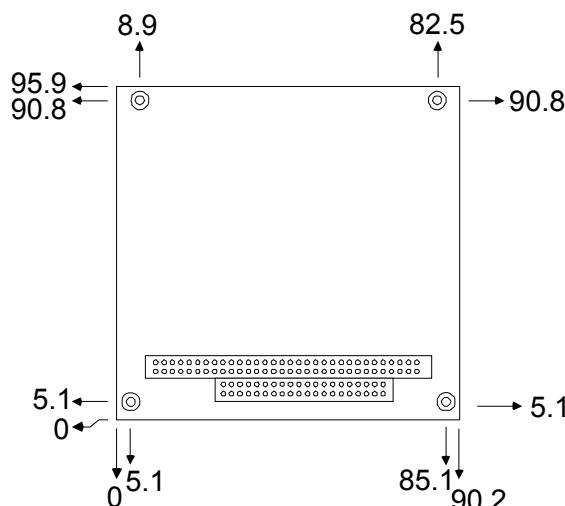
PC/104 module dimensions (mm) (± 0.1)
